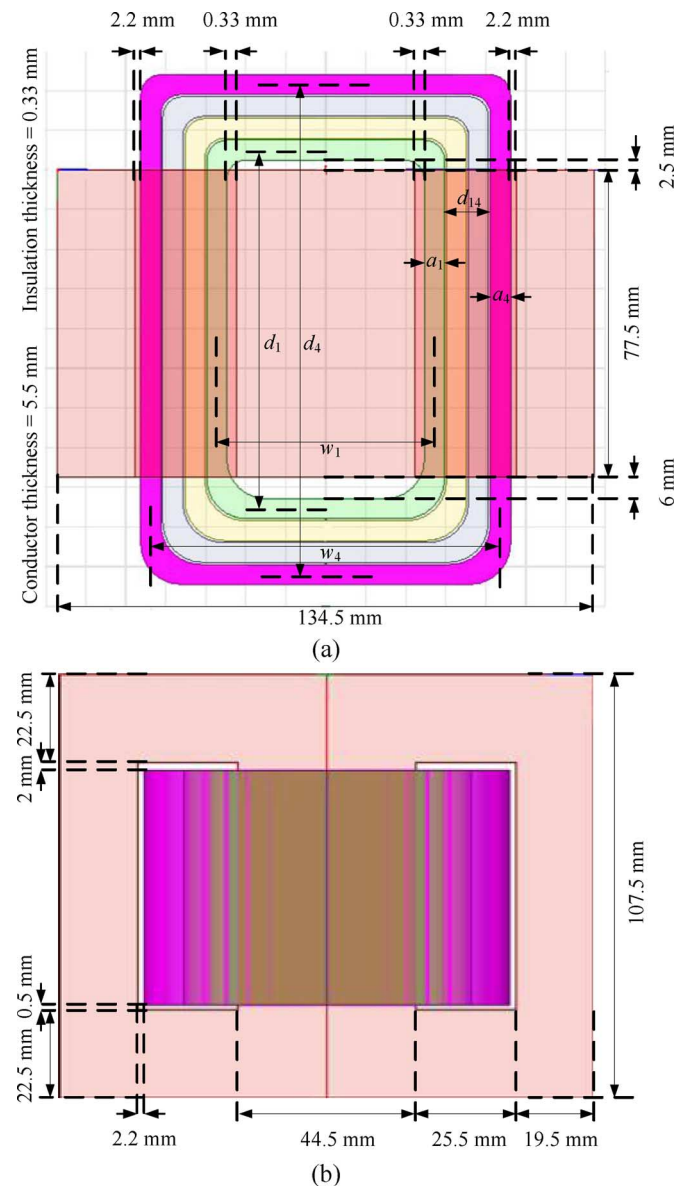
Transformer dimensions: (a) top view and (b) side view.
